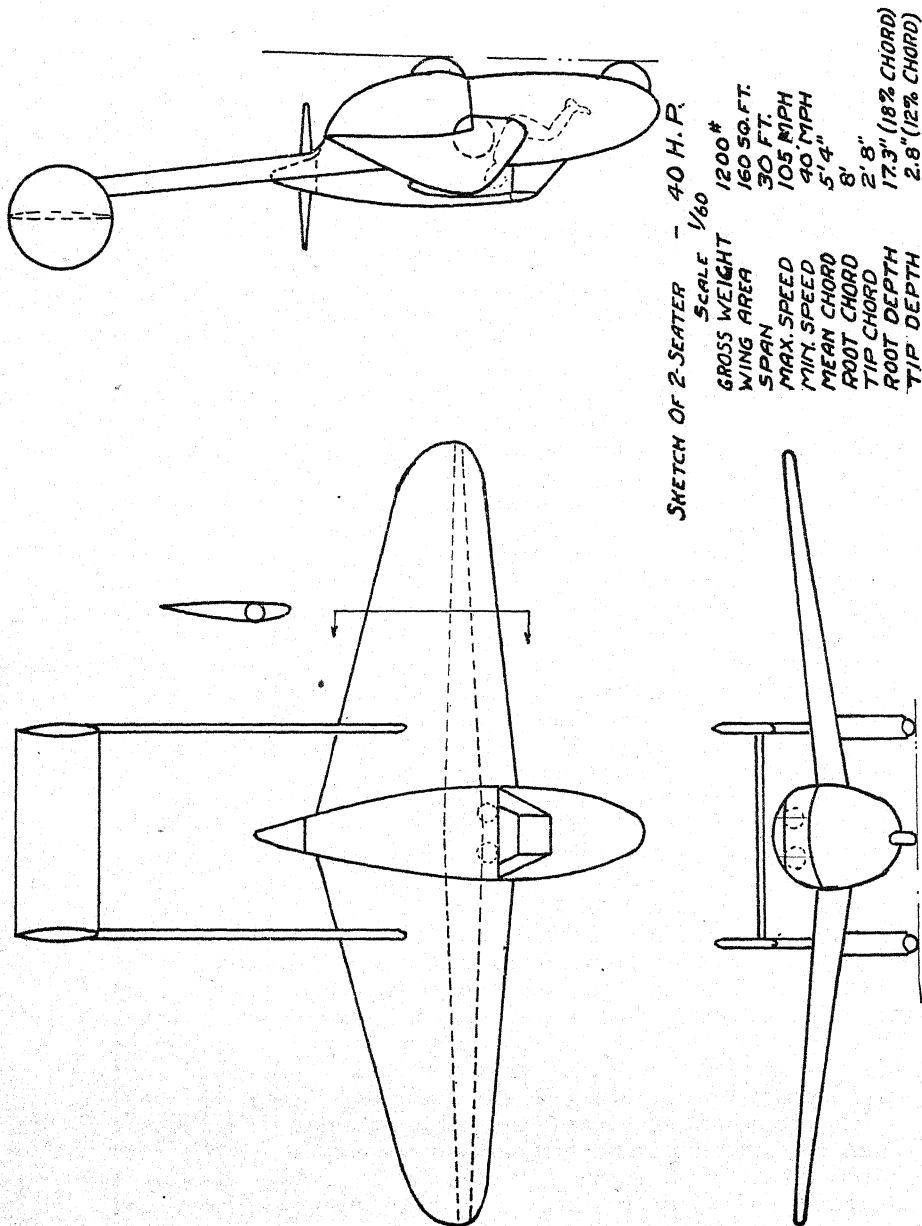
Three-view drawing of plane having an arc welded monospar.
